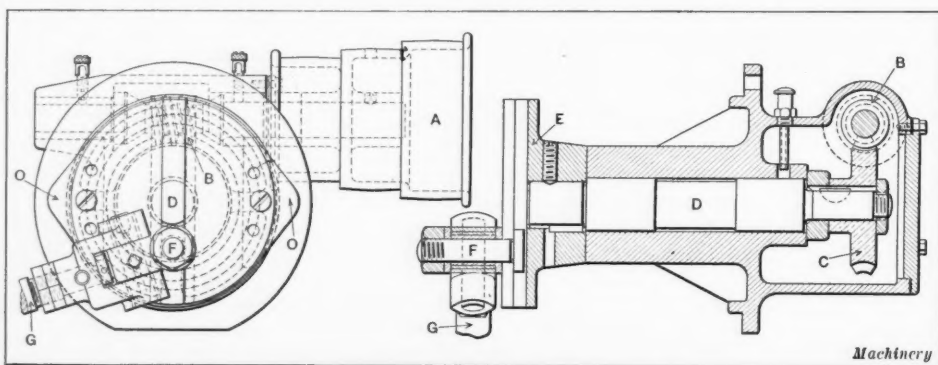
Longitudinal and Cross-sectional Views of Gear-box
